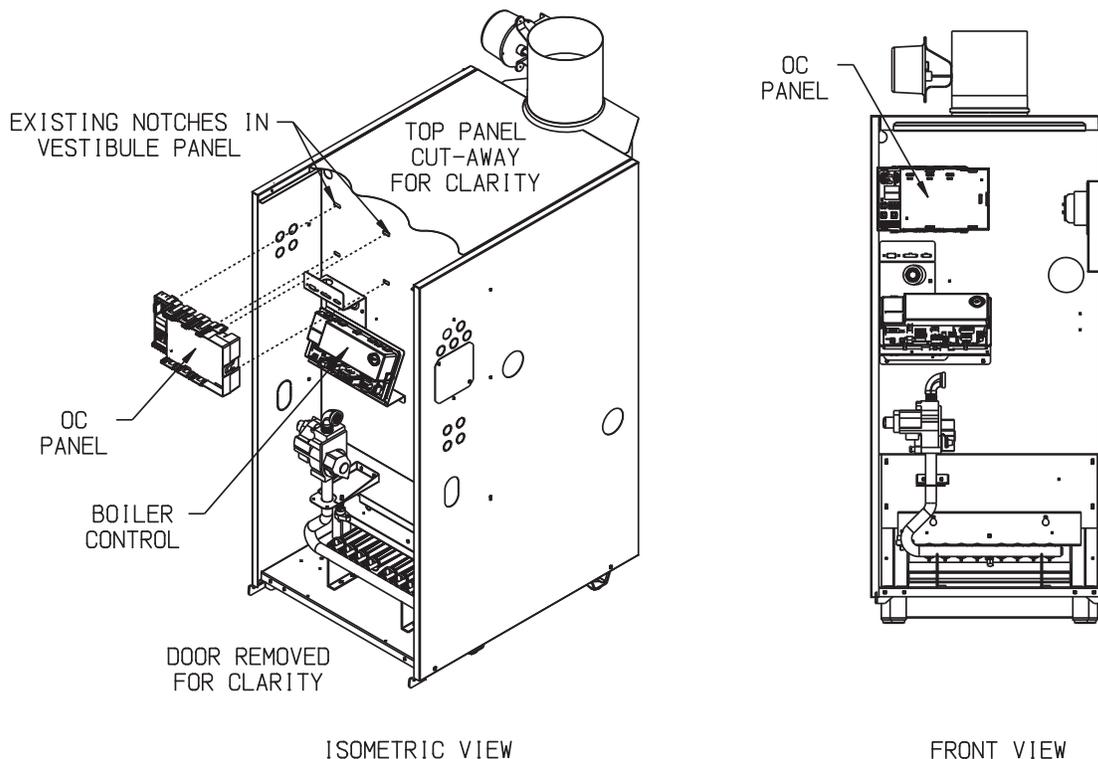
LOCATING THE OC PANEL ON AWR BOILERS
